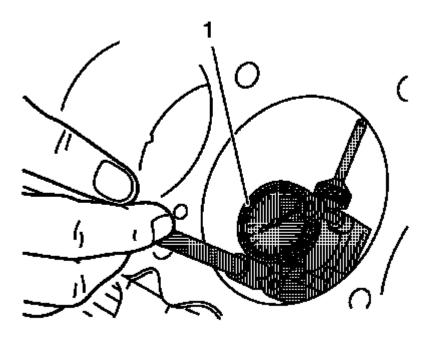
Inspecting Cylinder Bore Courtesy of GENERAL MOTORS COMPANY
